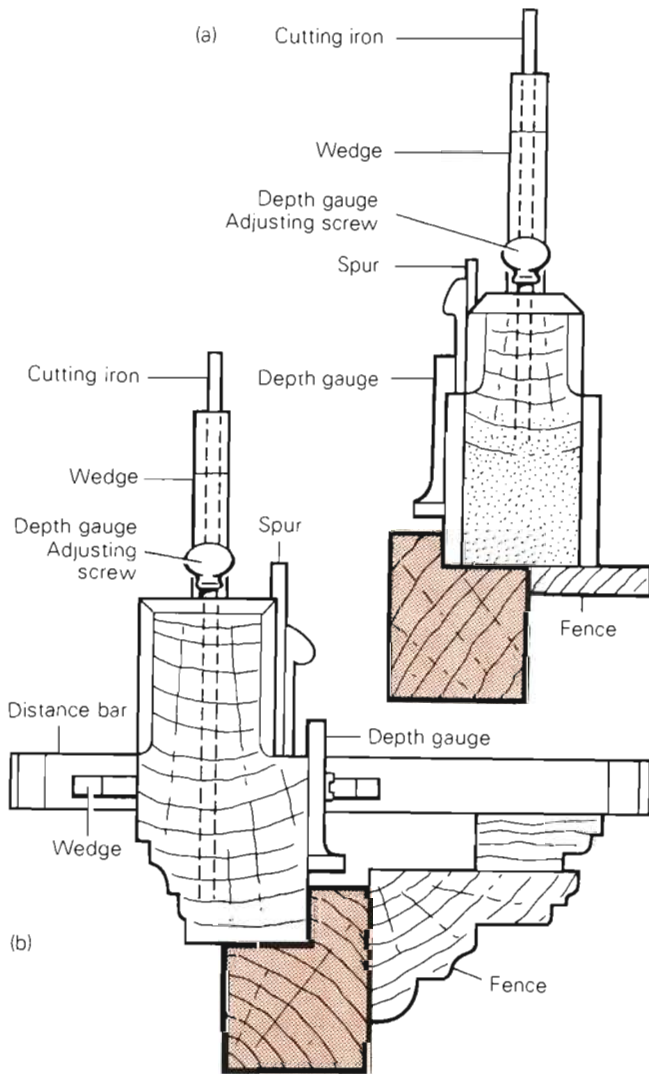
Fillister planes: (a) side fillister, (b) sash fillister.
